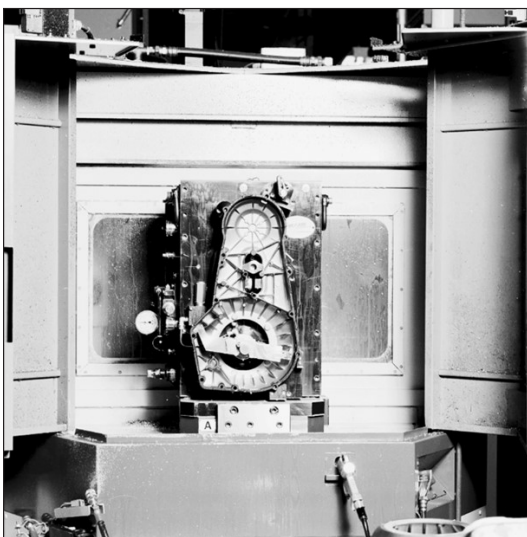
Machine tools, grinder, CNC mill, EDM machine
